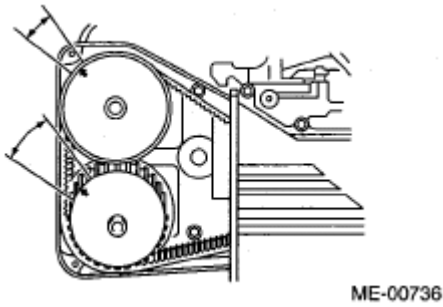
Identifying Arrow Mark On Cam Sprocket
